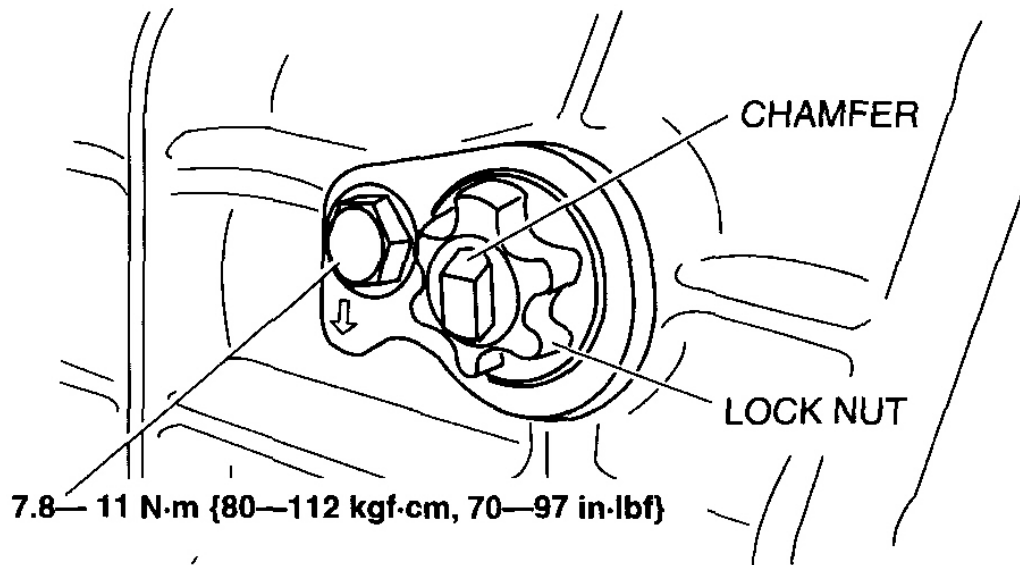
Installing Shift Rod Retaining Bolt
